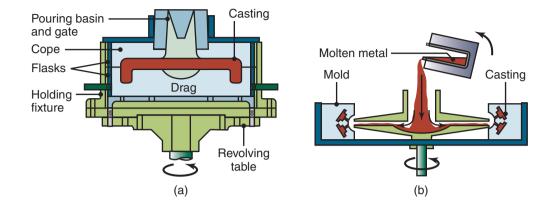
(a) Schematic illustration of the semicentrifugal casting process. Wheels with spokes can be cast by this process. (b) Schematic illustration of casting by centrifuging. The molds are placed at the periphery of the machine, and the molten metal is forced into the molds by centrifugal force.
